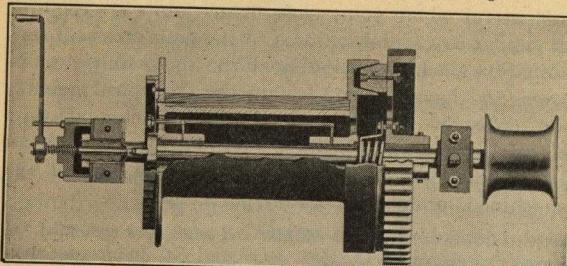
Section of drum, Clyde Iron Works, Duluth, Minn.
